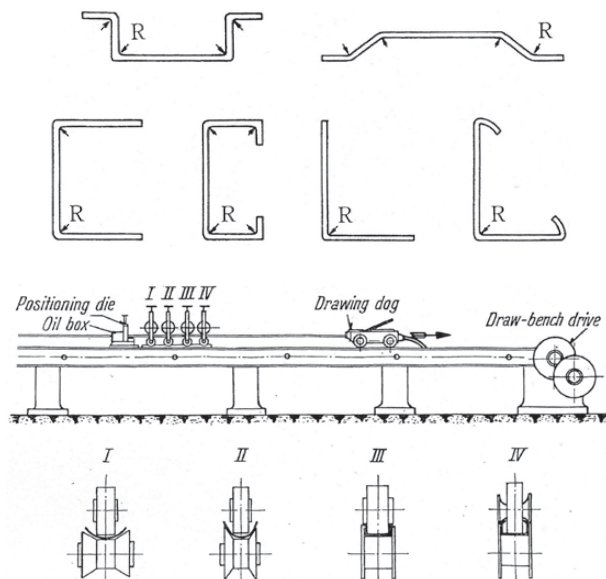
Shapes of profiles and roll forming machine¹⁰⁾.
